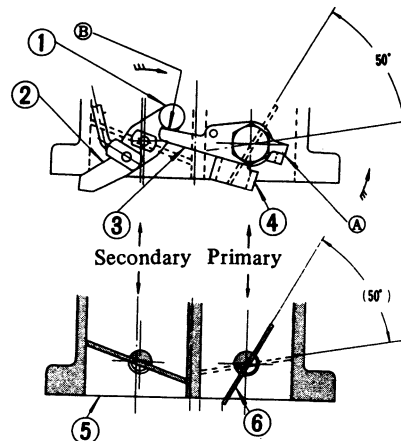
shows that primary throttle valve opens 50°. When primary throttle valve opens 50° adjusting plate integrated with throttle valve is in contact with return plate at
